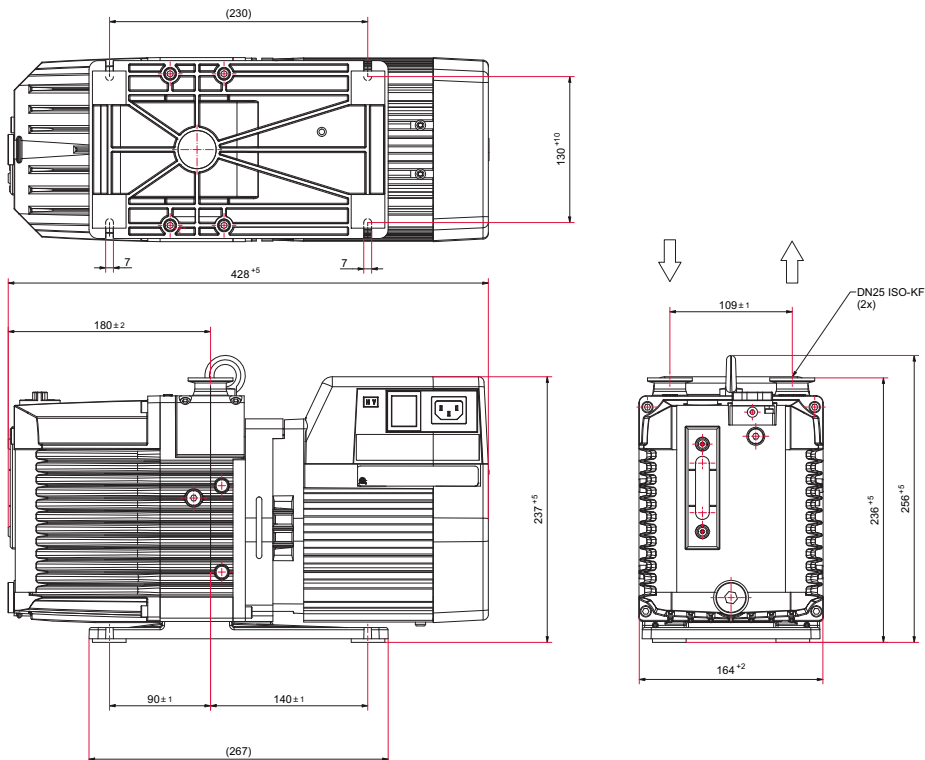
Dimensions DuoVane 12 with single-phase motor
